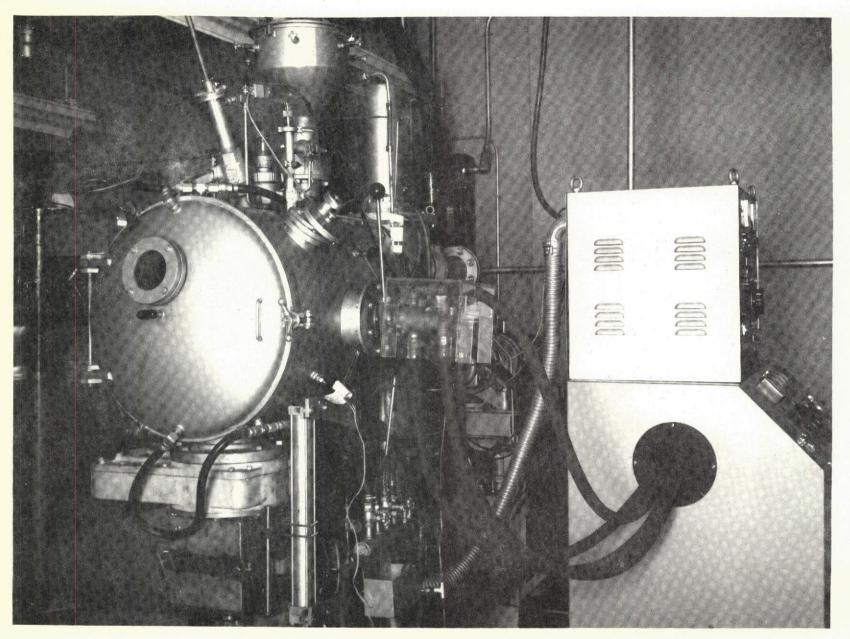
VACUUM INDUCTION MELTING AND CASTING FURNACE
